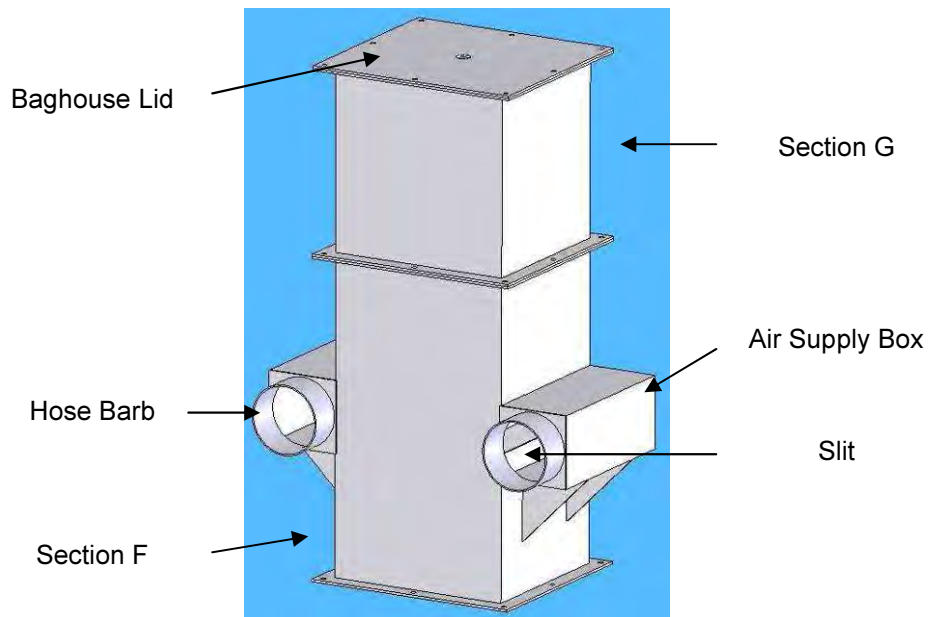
Solidworks drawing of Section E and F along with the lid that made up the clean air plenum of the single cell baghouse shell
